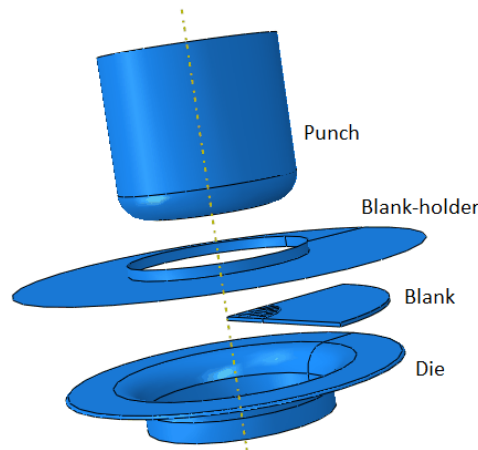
Numerical assembly of the cylindrical cup device.
